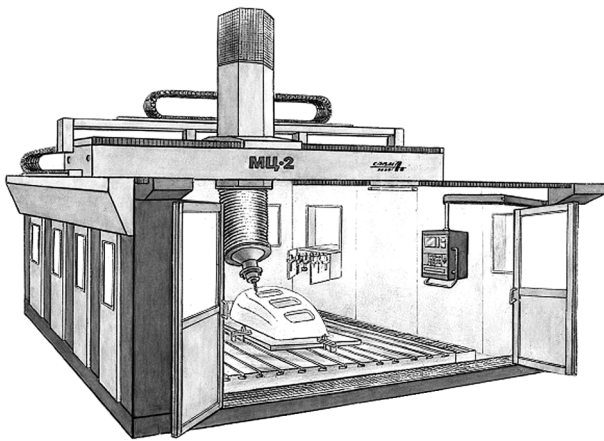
MTs-2 high-speed five-coordinate machining center.
